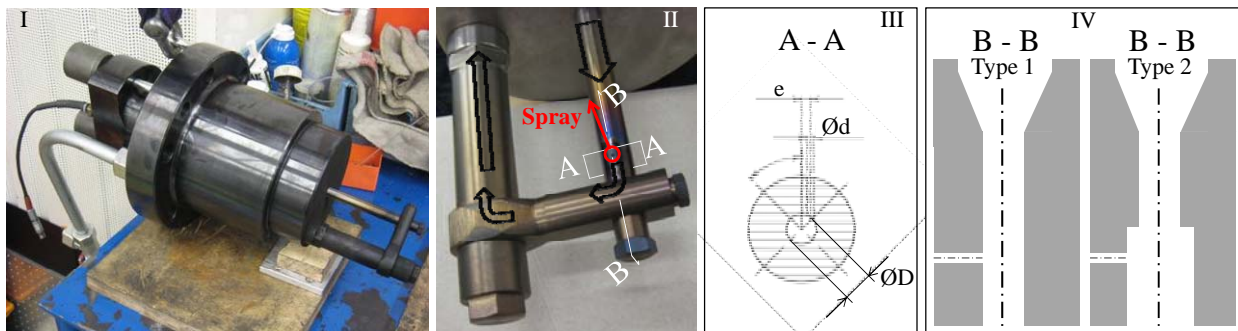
Injector design: Complete “injector in dummy” assembly (I), close-up view of injector arrangement including flow directions (II), injector frontal sectional view (III) and transversal sectional view (IV)
